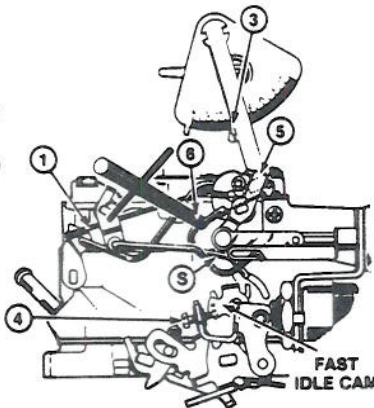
Choke rod adjustment (Typical) 2SE & E2SE carburetors
